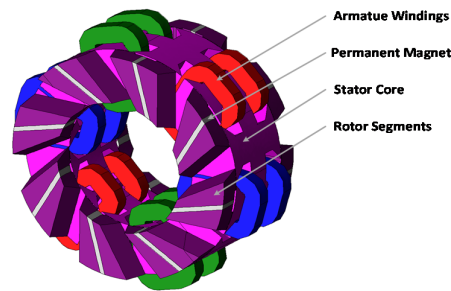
The Rotor Excited Axial Flux-Switching Permanent Magnet Machine (RE-AFSPM)
